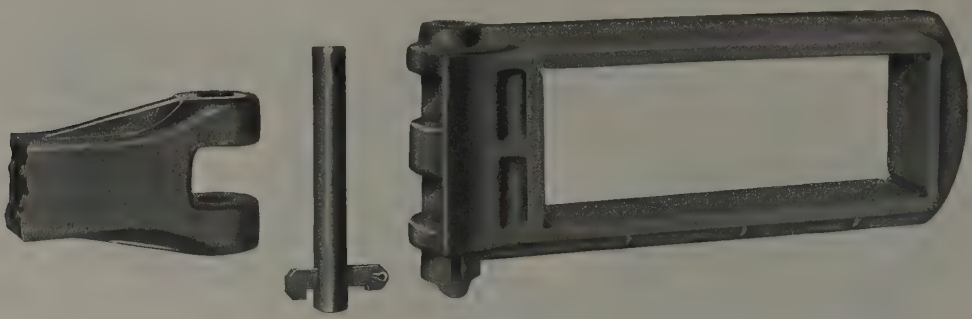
Cast Steel Yoke with Quadruple Shear Pivot Pin.
